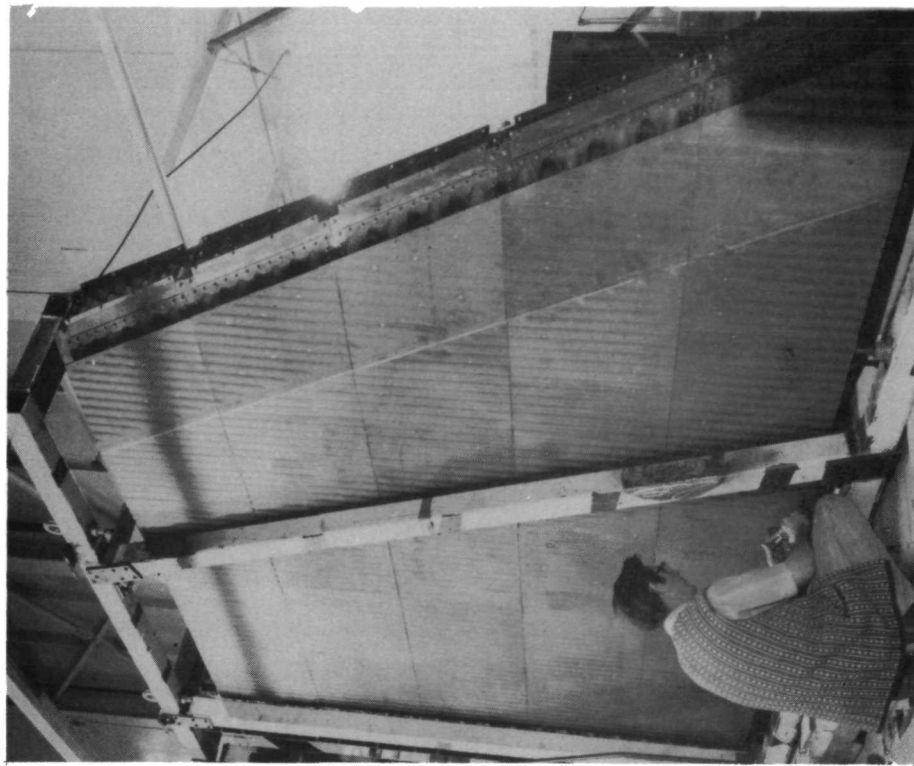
Lower Surface of the Leading Edge Outboard (Inspector is checking the final torque on the heat shield attach screws.)
